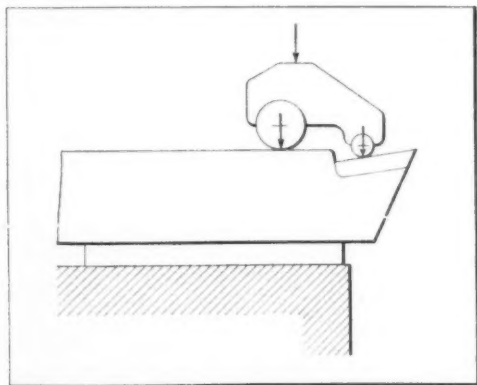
When grinding a brazed carbide-tipped tool by the high-temperature technique a clamp of the type here shown may be employed, so that both the shank and the tip are securely held
